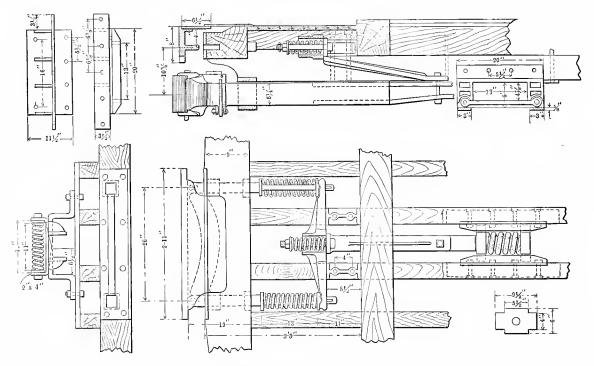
National Continuous Platform Buffer and Equalizing Yoke with Hinson Single Spring Draft Gear. National Car Coupler Company.
